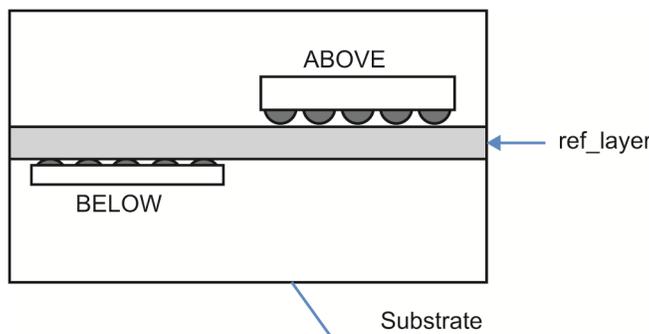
Explanatory drawing of mount layer for placement blockage area
